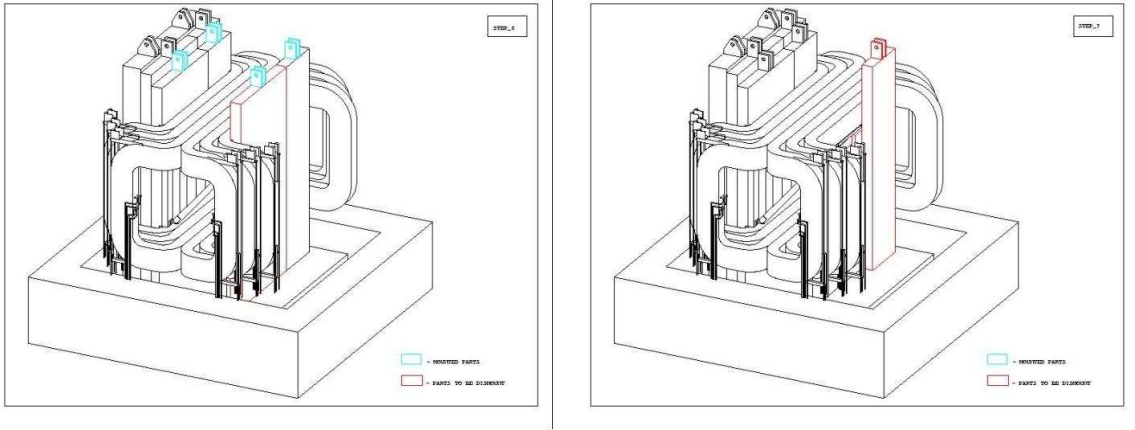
SM3 Analysis Magnet disassembly steps 7 (left) and 8 (right)
